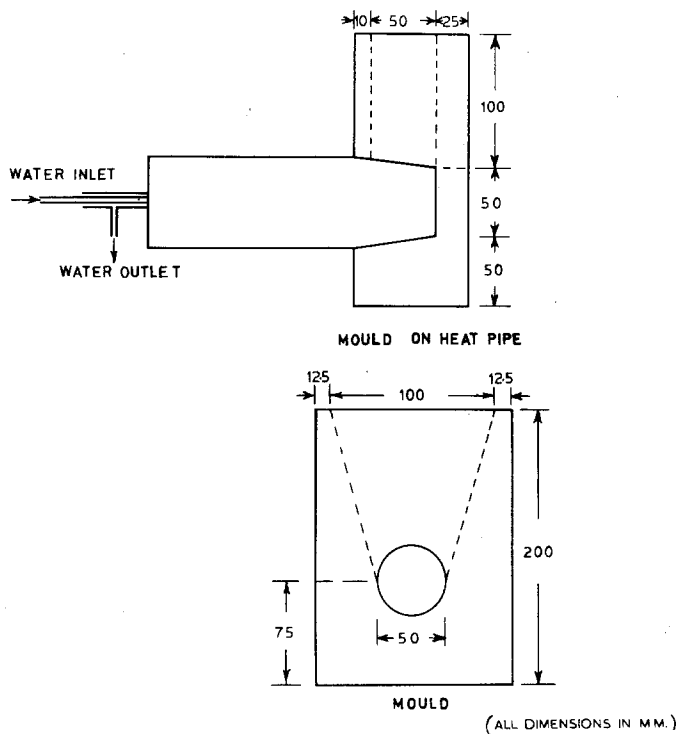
Diagram illustrating the heat pipe/mould assembly.
